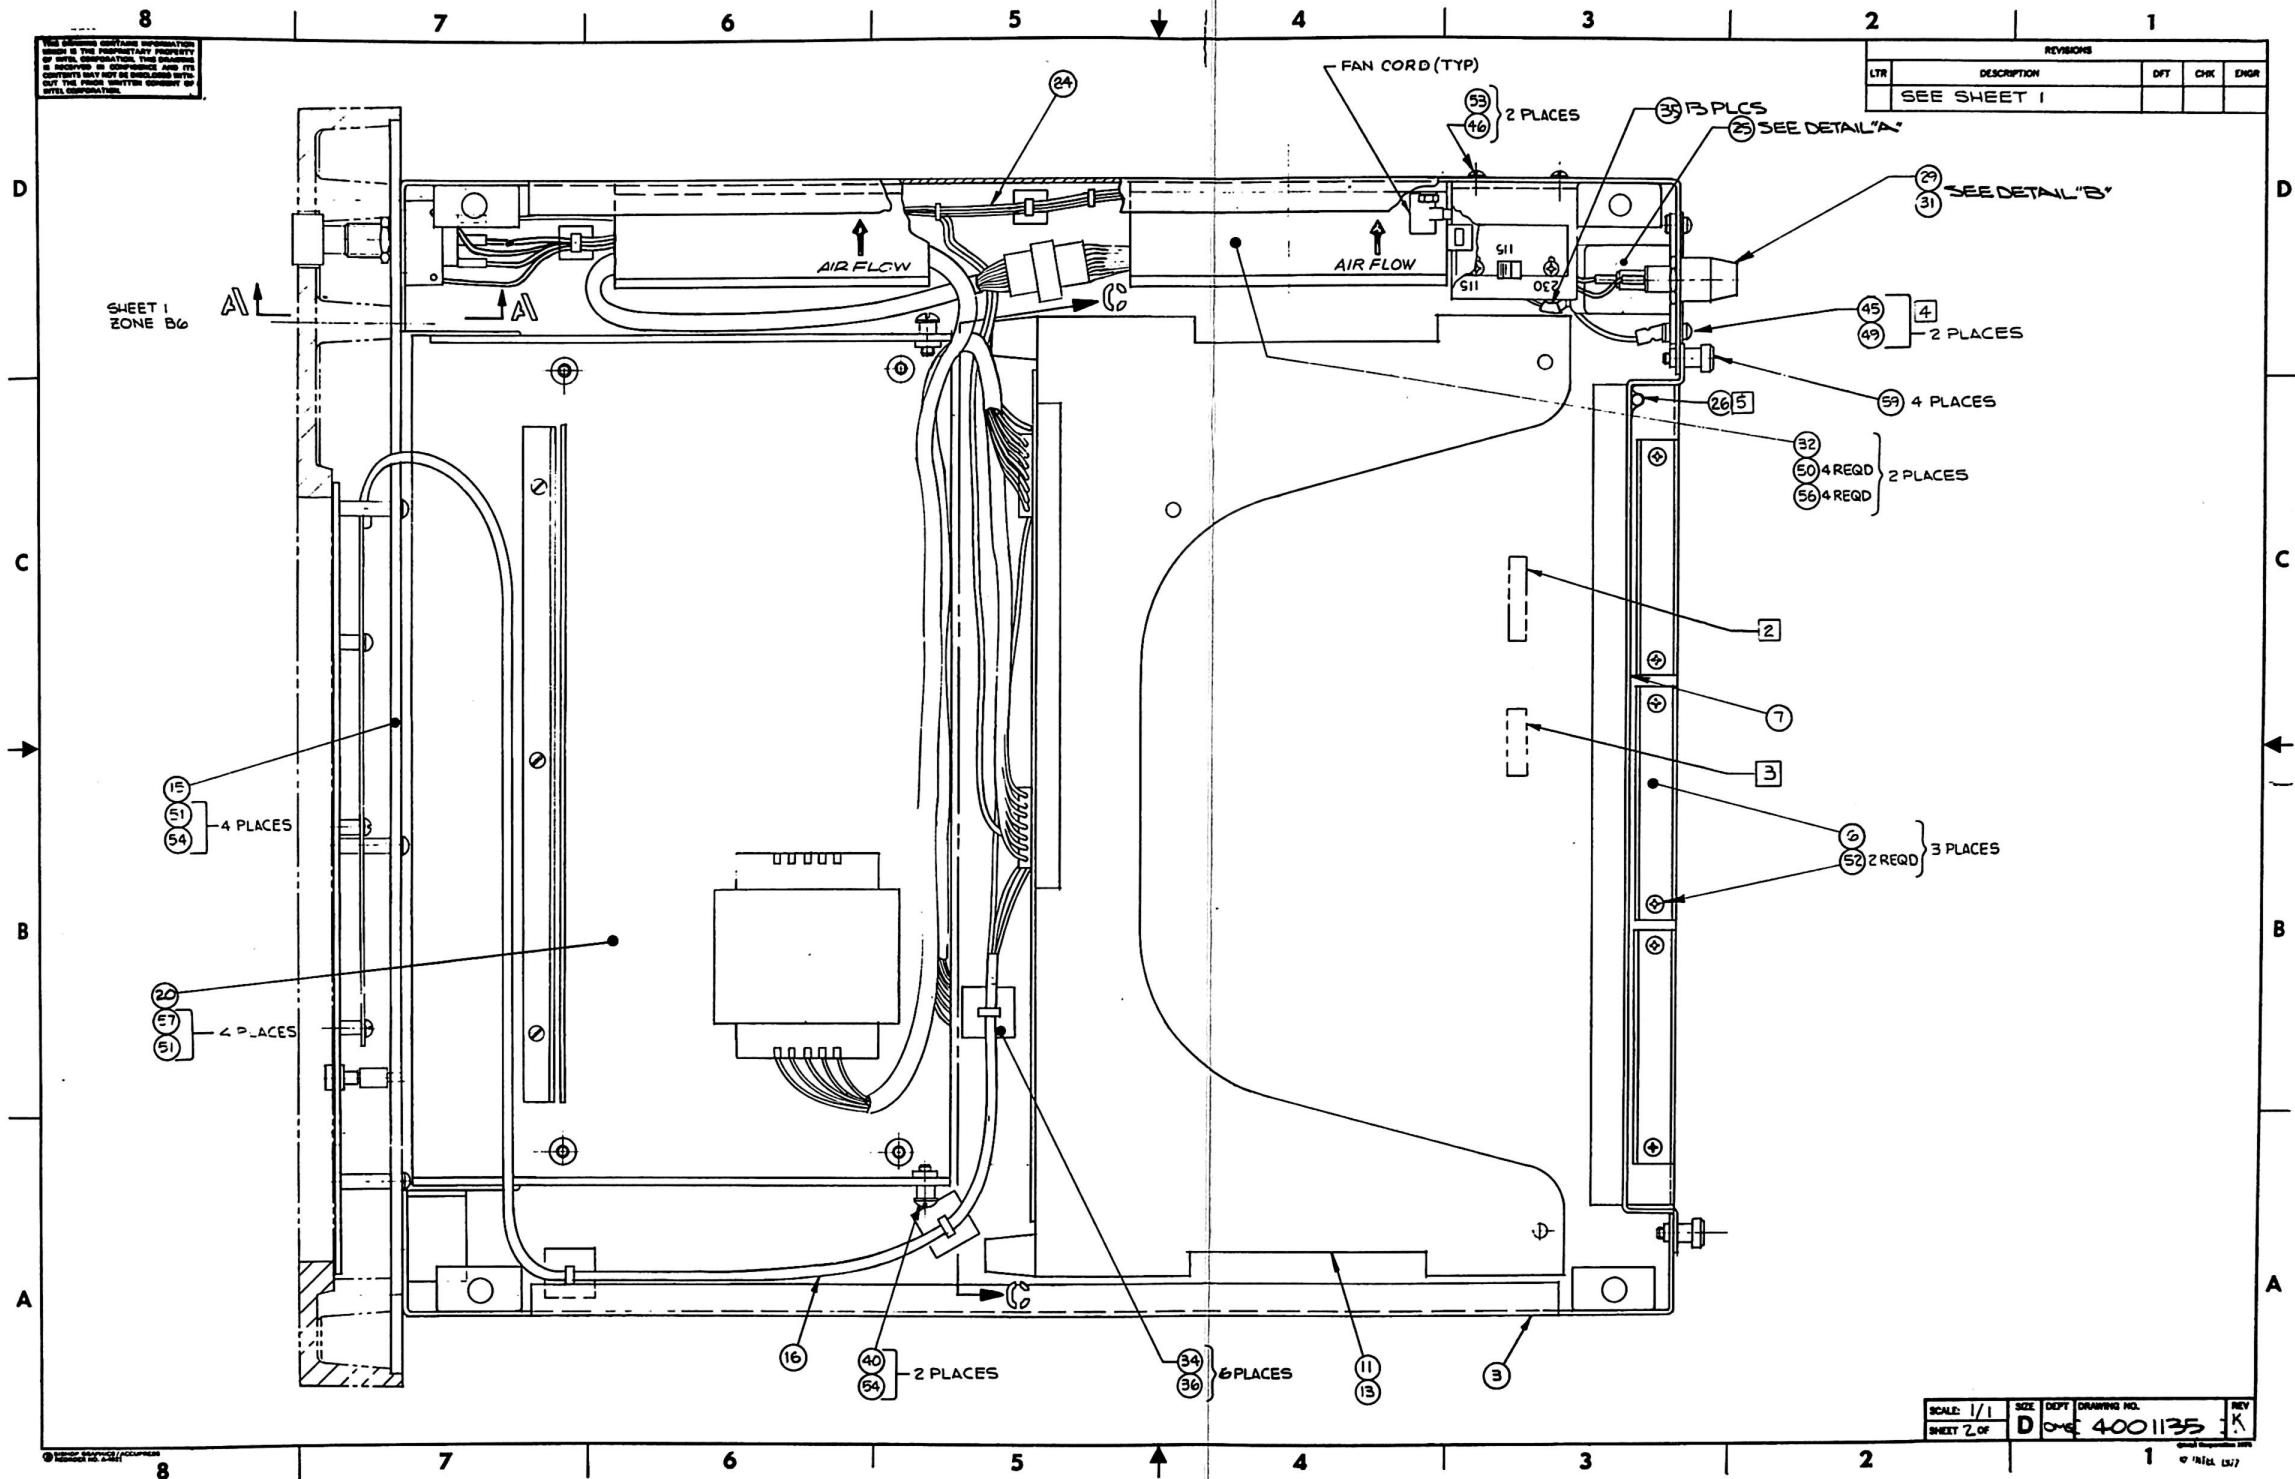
Main Frame Assembly (Sheet 2 of 2)
